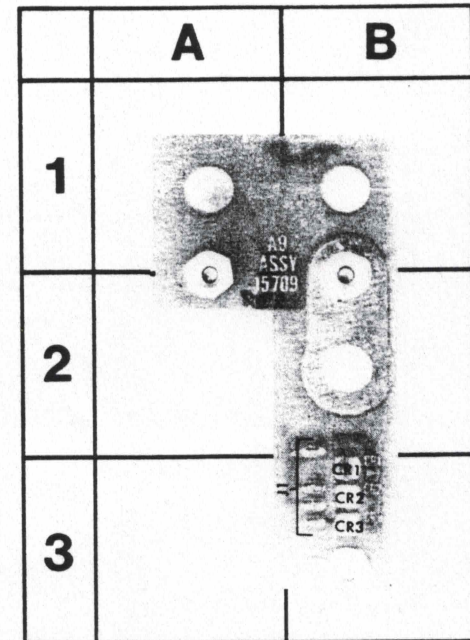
IEEE INTERFACE PCB ASSEMBLY
